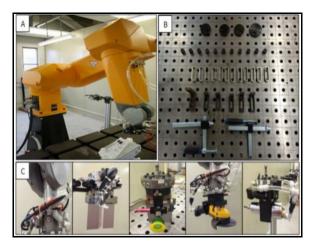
Staübli RX160 robot disassembly cell with accessories
